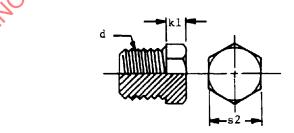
TYPE B HEXAGON OUTSIDE HEAD PLUGS
